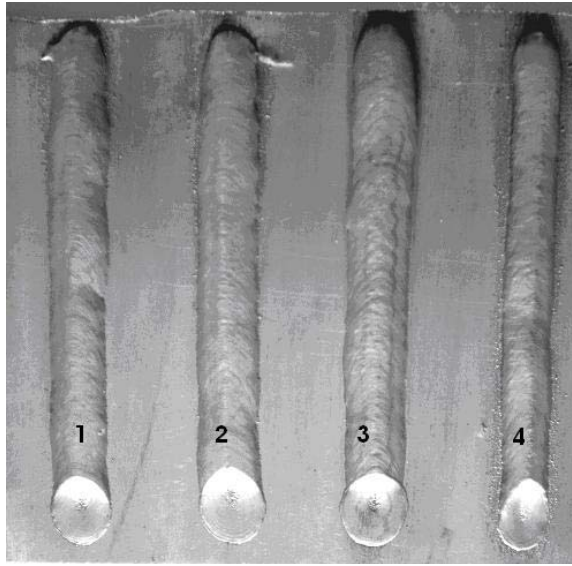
Surface welded plate IV with four different welding parameters
